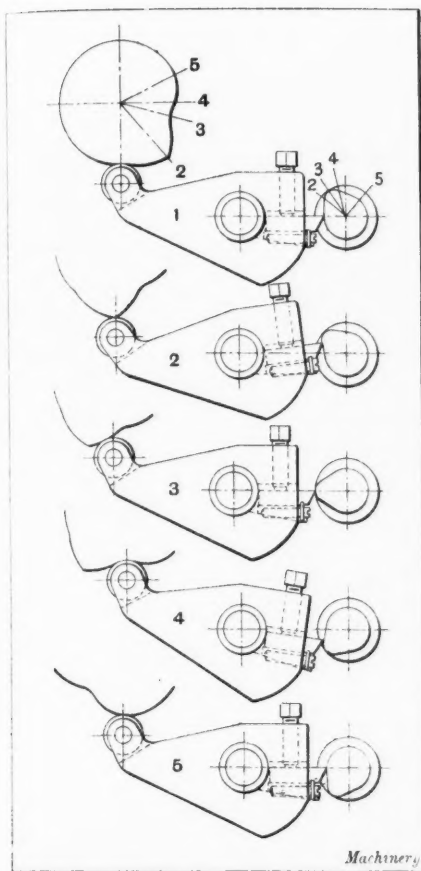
Different Positions of Cutting Tool in Relation to Cam Surface
